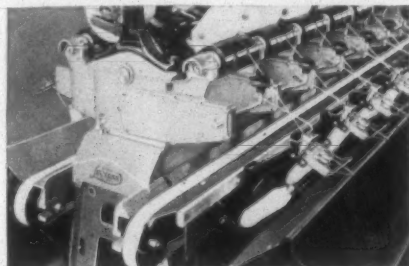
Empty bobbins removed from the supply spindles are placed on the conveyors and are carried to the end of the machine where they are accumulated in empty bobbin boxes.
